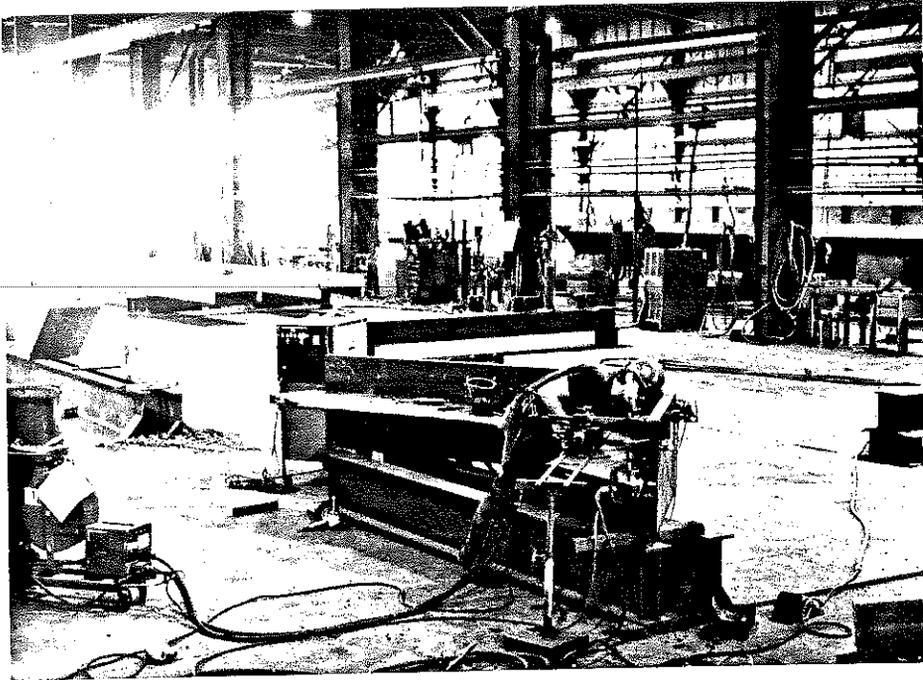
Automatic SAW for Straight Flange-to-Web Welds. Note the Acoustic Emission Weld Monitor to the Left of the Weldment.
